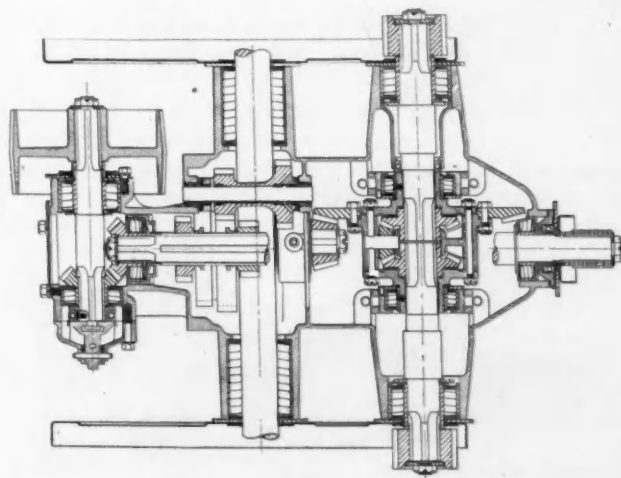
HORIZONTAL SECTION THROUGH EMERSON-BRANTINGHAM 12-20 TRANSMISSION
